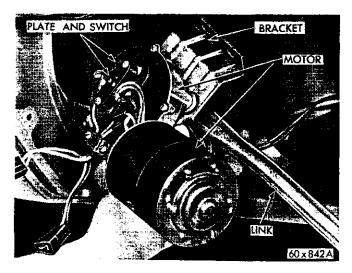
Removing the Windshield Wiper Motor and Link Assembly (Typical)
